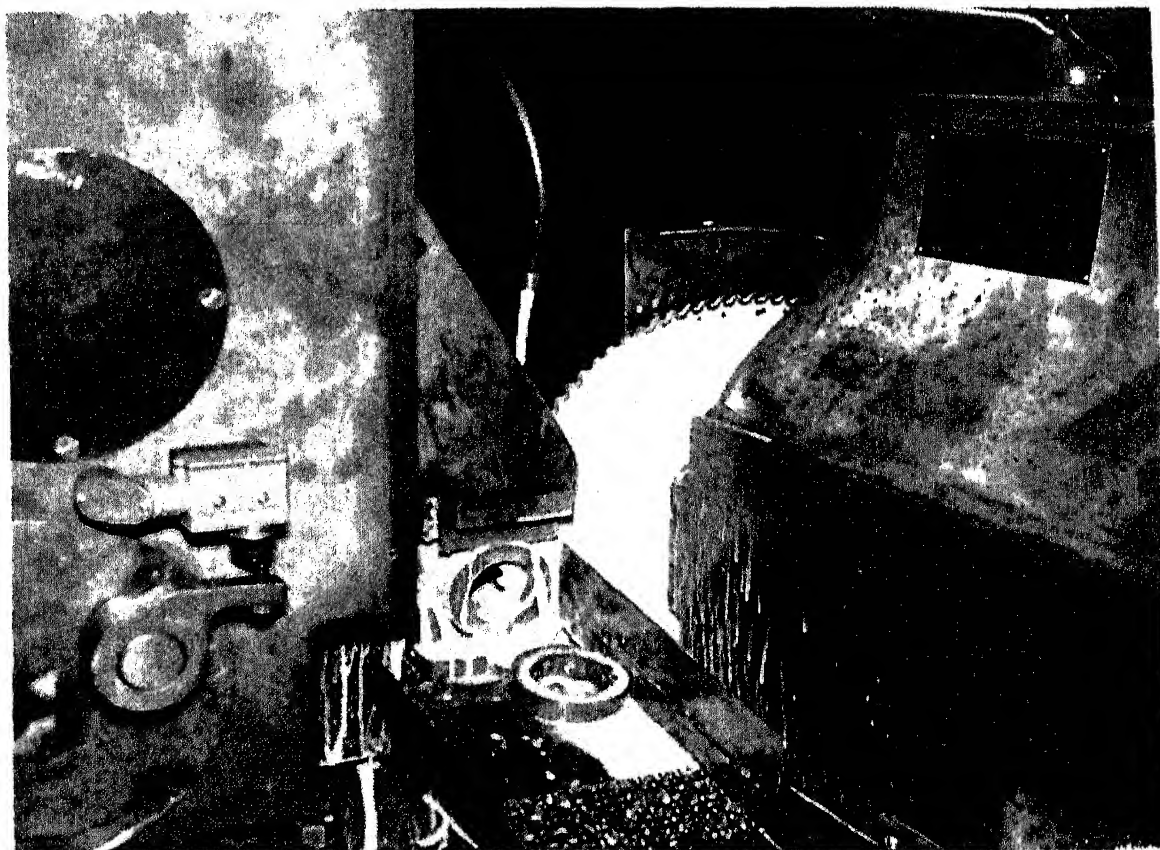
A circular sawing machine that uses a cold saw to cut stock up to 4 in. square or round. (Courtesy The Motch and Merryweather Machinery Co.)
